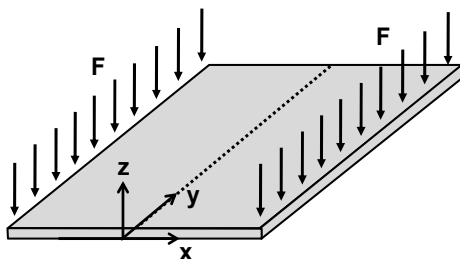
Analysis case in which force is applied at both ends, perpendicular to weld line.
